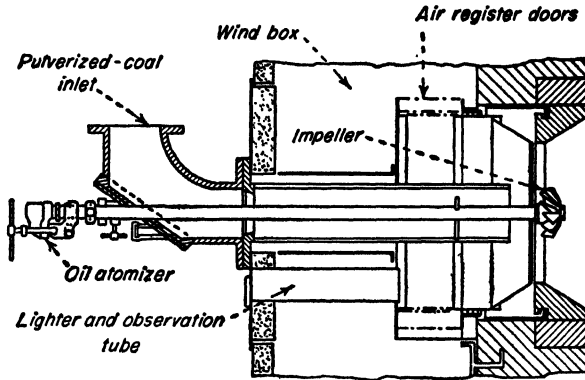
Horizontal circular burner for oil and coal. (The Babcock & Wilcox Co.)
